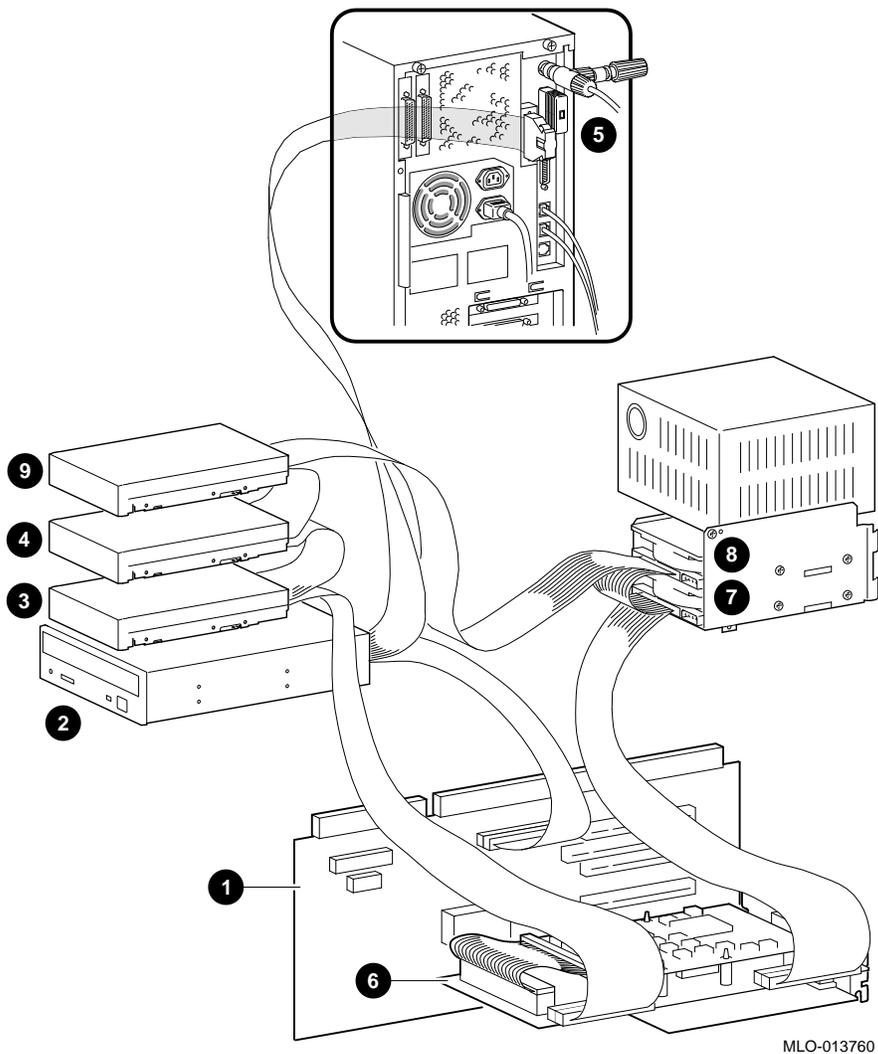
SCSI Cable Routing for Optional Hard Drives in Front Drive Bay
